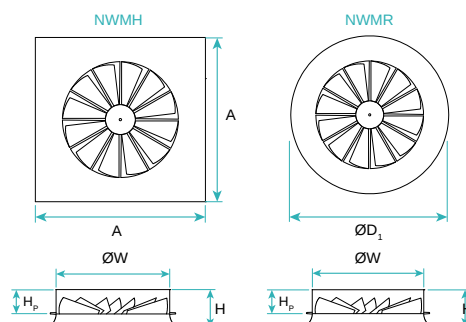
Dimensions of the NWMH/NWMR diffuser front panel.
